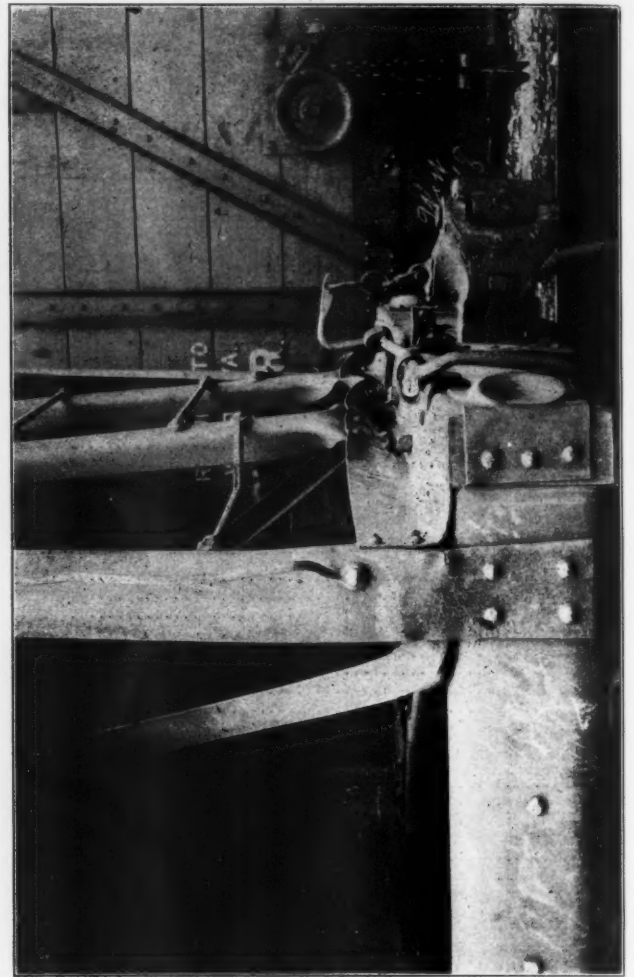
UPRIGHTS AND UPPER PART OF END SILL PLATE DAMAGED.
